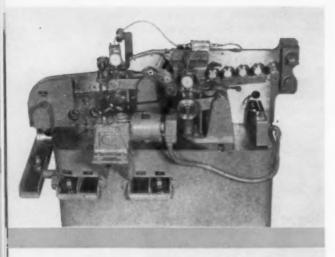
View of the automatic gage shown in Fig. 4 with cover open to show the lever arm gaging mechanism and the compact mounting of the gaging units.
